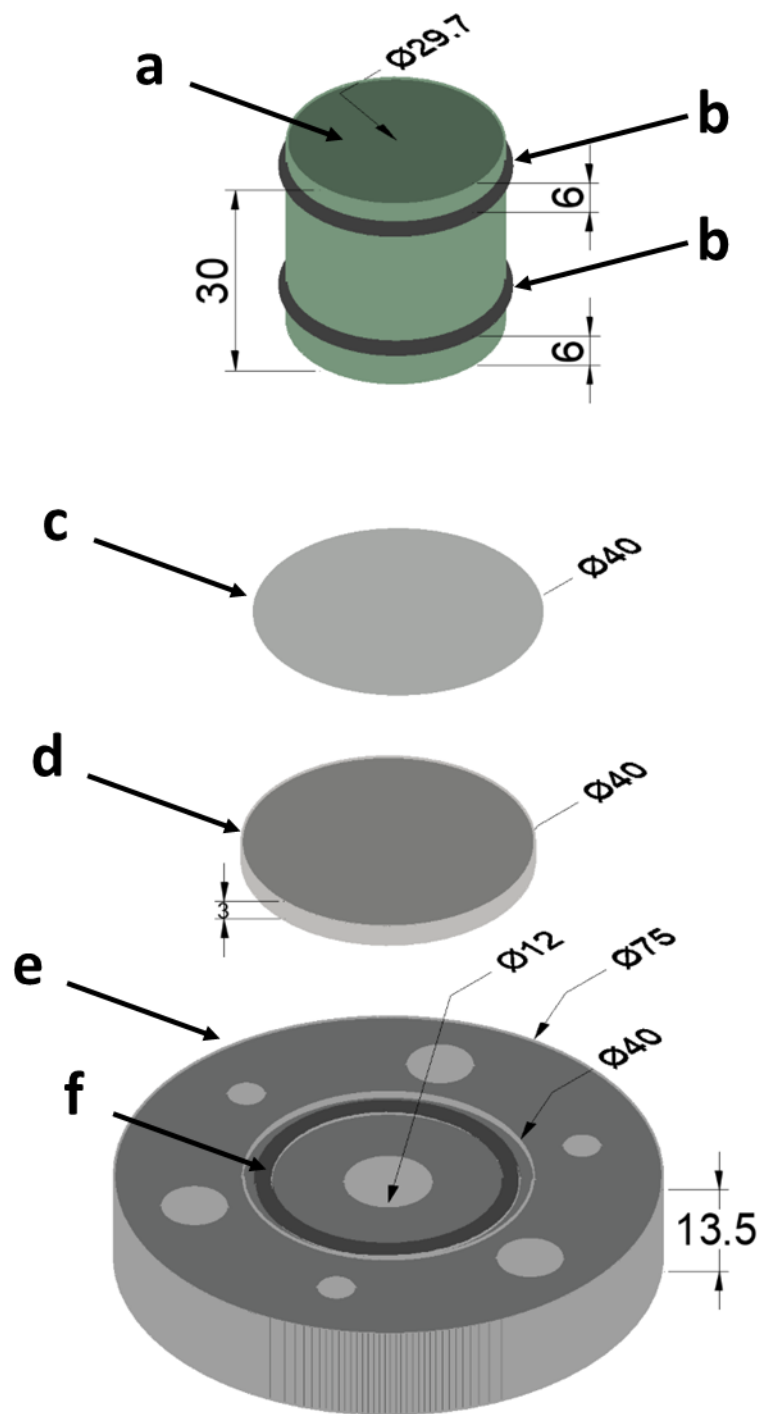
Detailed schematic of the filter assembly (dimensions in mm). a, is the Delrin® piston; b, is a Nitrile 70 O-ring; c, is a circle of filter press membrane fabric; d, is a porous sintered stainless steel support; e, is the piston cylinder end-cap; f, is a Nitrile 70 O-ring.
